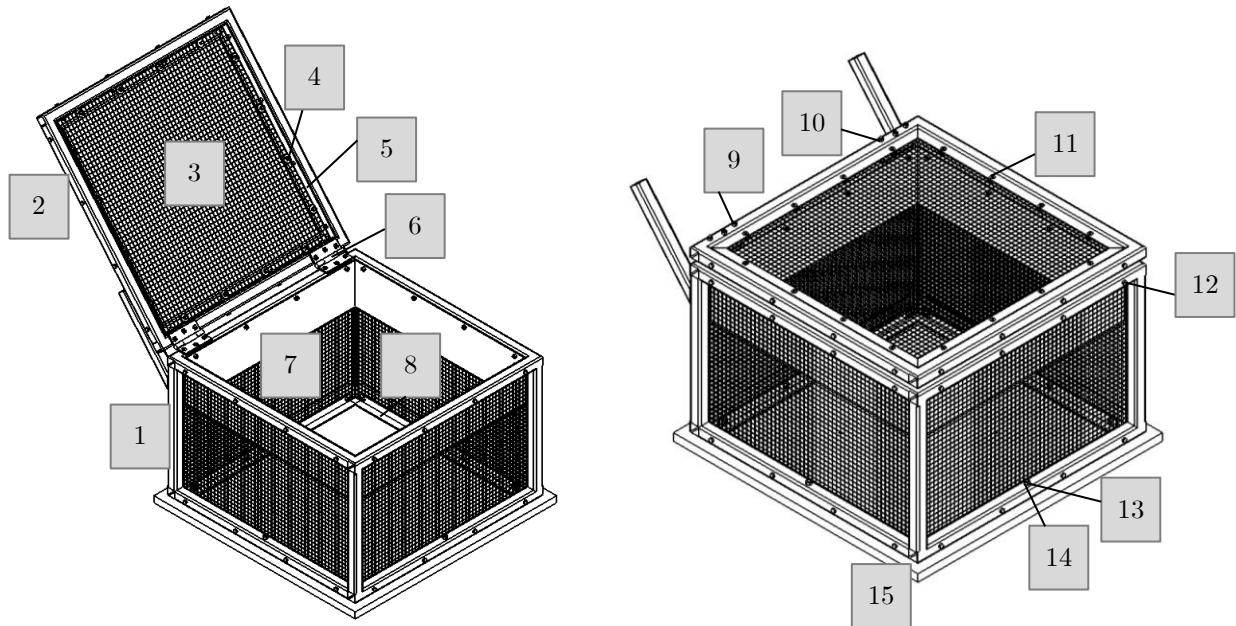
Open (left) and closed (right) isometric views of enclosure showing components
